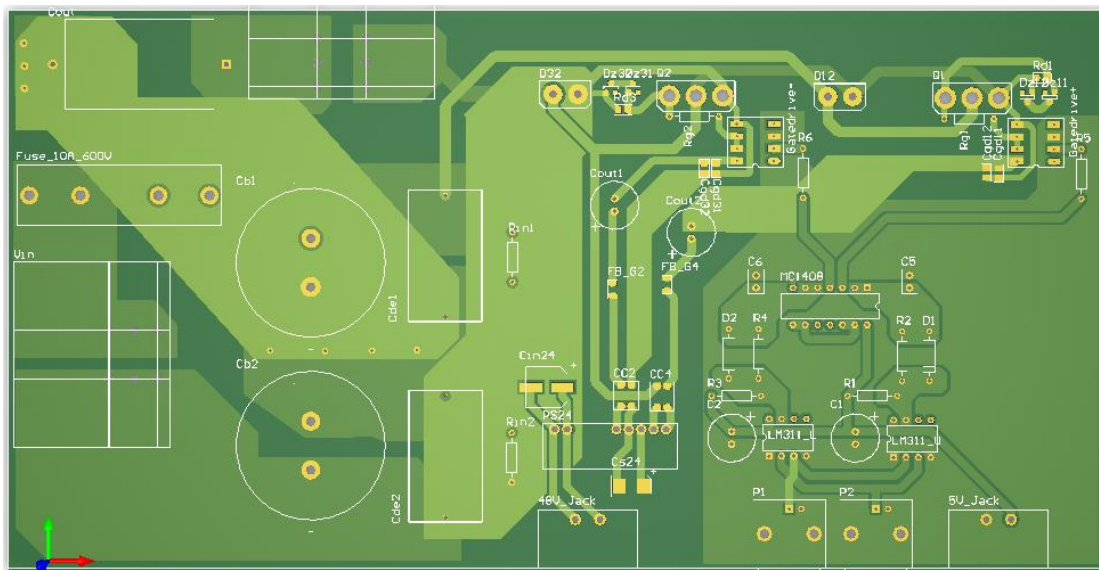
PCB for half-bridge inverter in Altium Designer[®]
